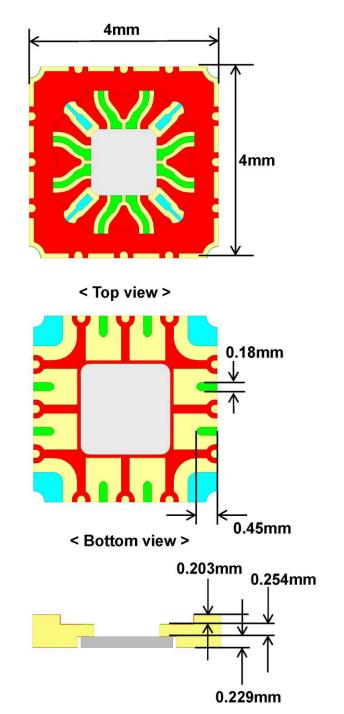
CQFN 24-Pin Package Drawing (All Dimensions in mm)
